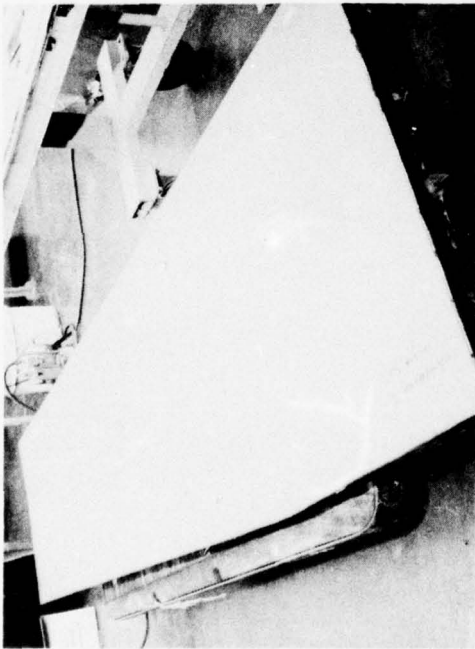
GLASS/EPOXY SPOILER MOLDING TOOL
